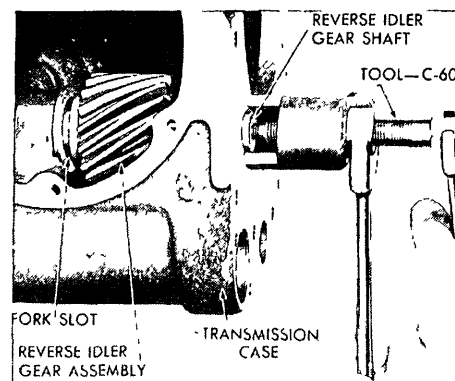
Removing reverse idler gear shaft, 1946-52 automatic transmission
